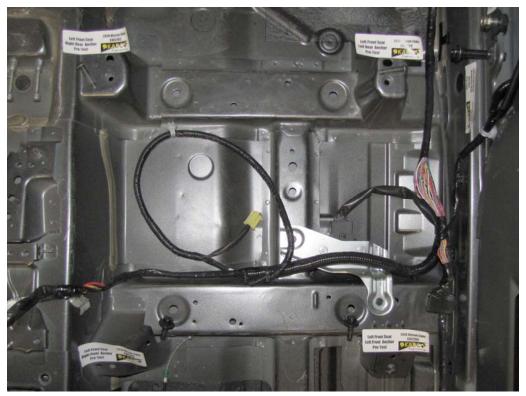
Floor Pan Anchors, P1 Overall, Pre-Test
